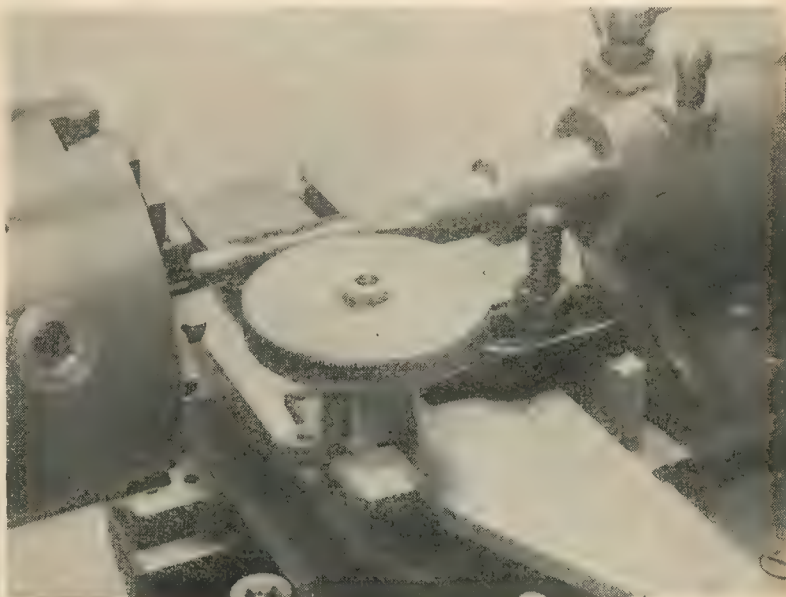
Cutting the worm-wheel teeth with a tap driven by the lathe mandrel and the blank pivoted on the cross-slide
